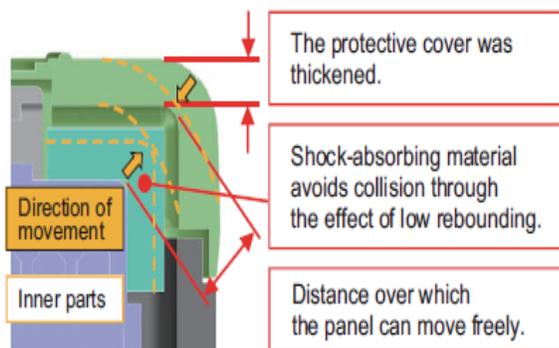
Modified corner of the cassette. Breakage and internal damage to the cassette due to dropping can be avoided.
